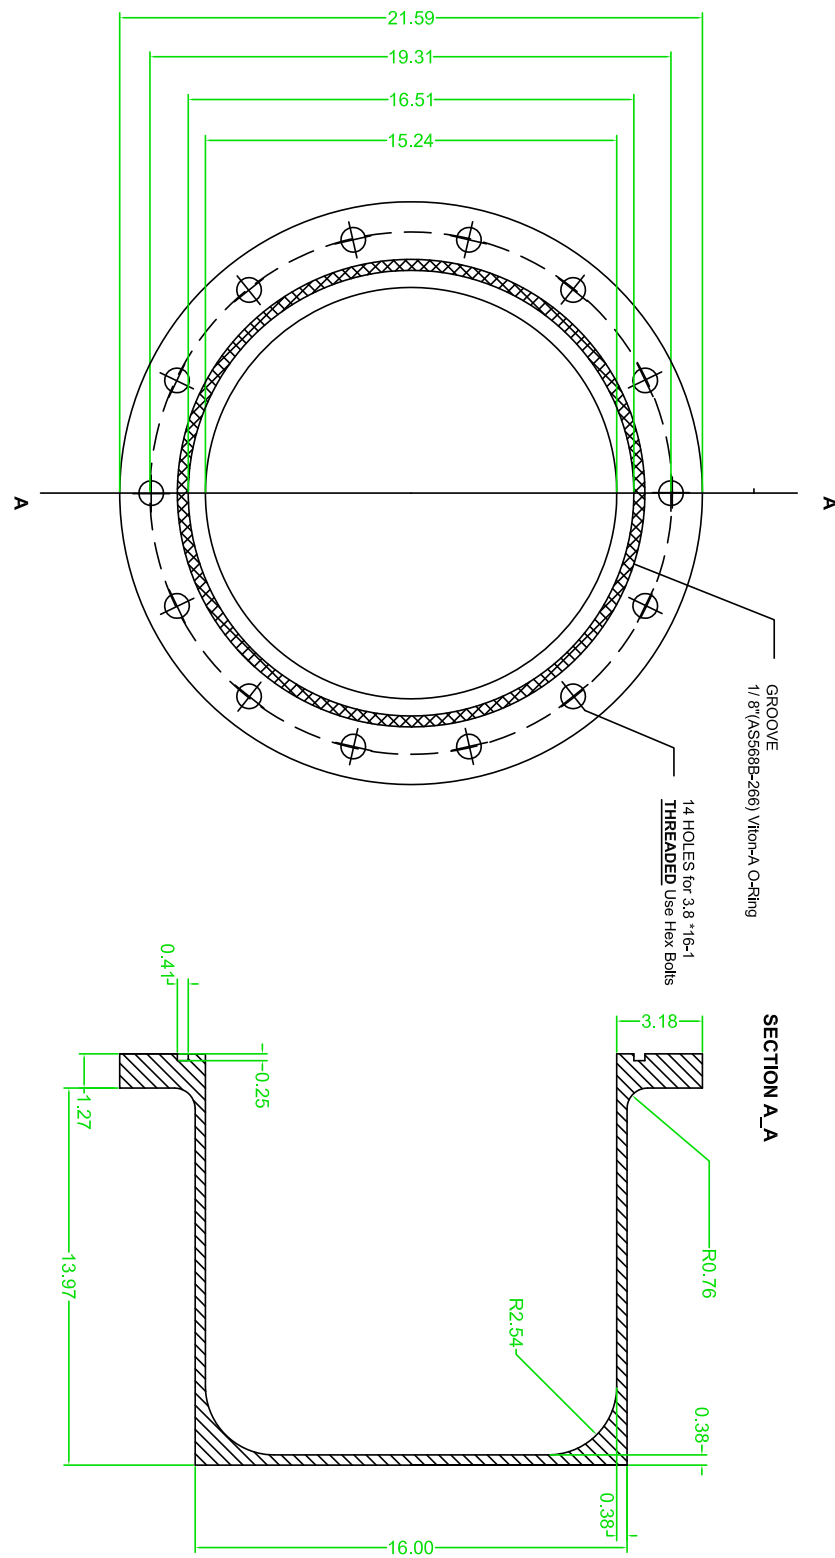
The details of the aluminum cap designed for the prototype detector vacuum chamber.
